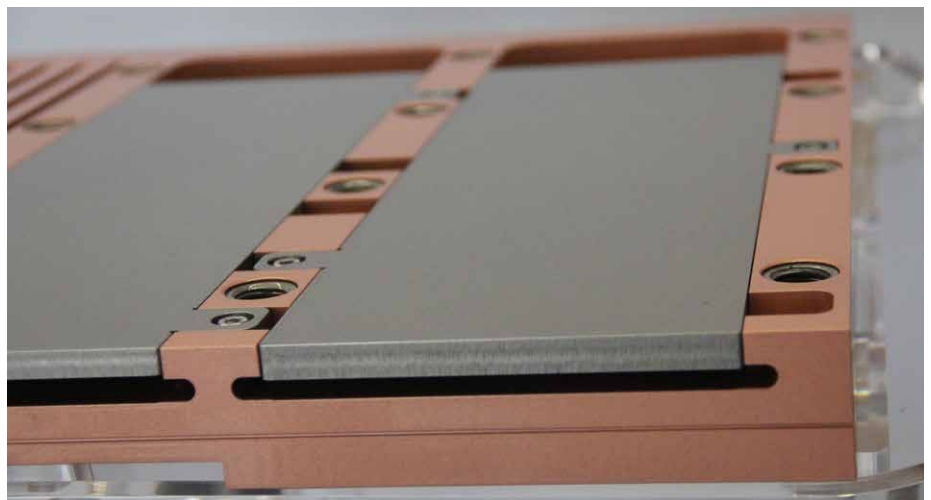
Mould plate with strategically positioned filler pieces (Picture: cunova GmbH)
